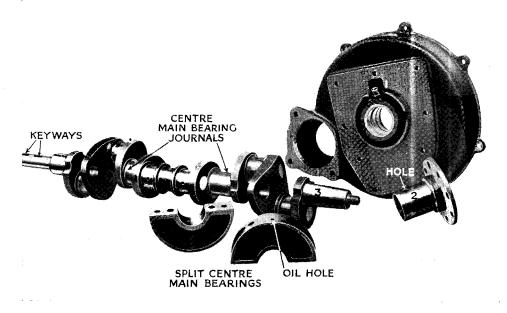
Illustration No. 51.—View of the crankshaft removed from the engine and its relation to the front end housing. It will be noted that the two centre main bearings are split in two halves. The rear end of the crankshaft is fitted with a sleeve to receive the flywheel. The front end main bearing is white-metal lined.
